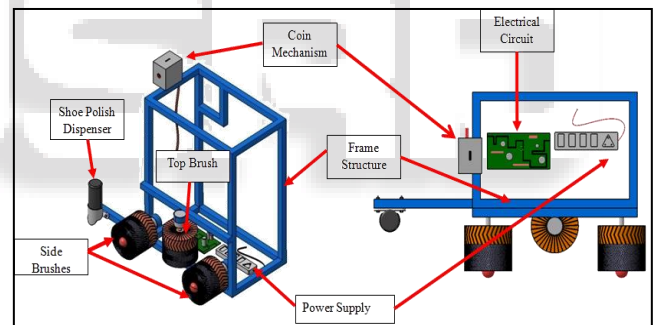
Second conceptual model (B) Top and side brush shoe polishing machine with coin mechanism
